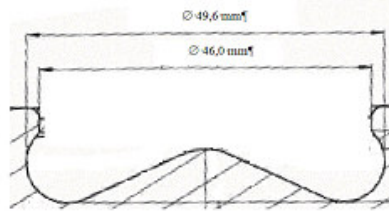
Piston bowl geometry A, with a piston bowl diameter of 49,6mm and a piston bowl neck diameter of 46mm
